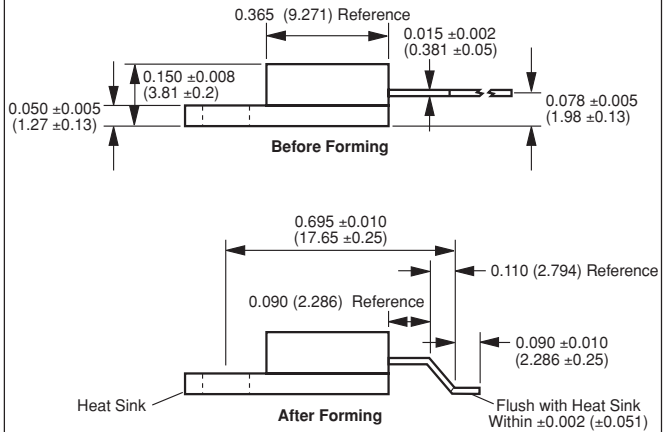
VPR220S DIMENSIONS in inches (millimeters)
